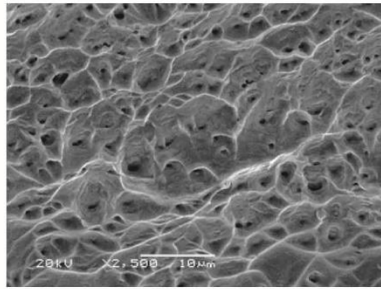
Fracture surface of the welded specimen, which occurred in the base material as indicated in Fig. 8.
